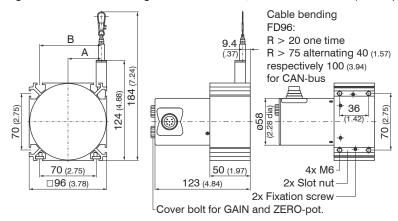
Dimensional drawing ... - FD96 - SR - U/I, dimensions in mm (inches), not to scale
